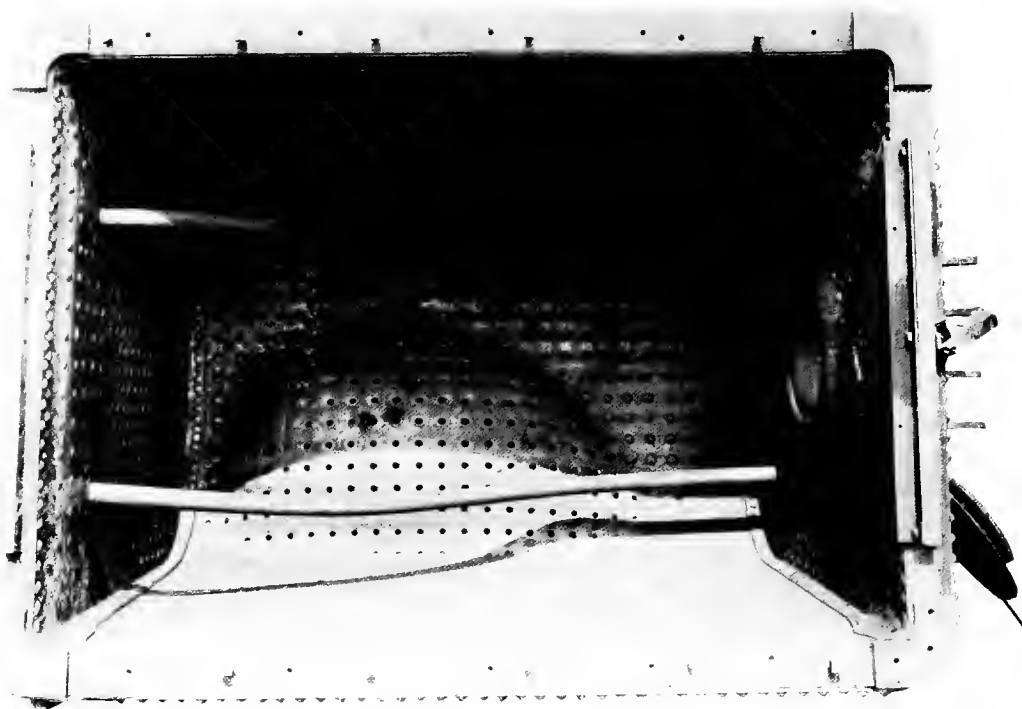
Photograph of radial-stay boiler, after low-water test, showing the failed crown-sheet. A large pocket was formed in the forward right side of the crown-sheet, the sheet pulling away from 188 crown-stays and stay-bolts. The button-head stays failed by heads breaking inside of sheet and the flat-headed stays pulled through the sheet.
